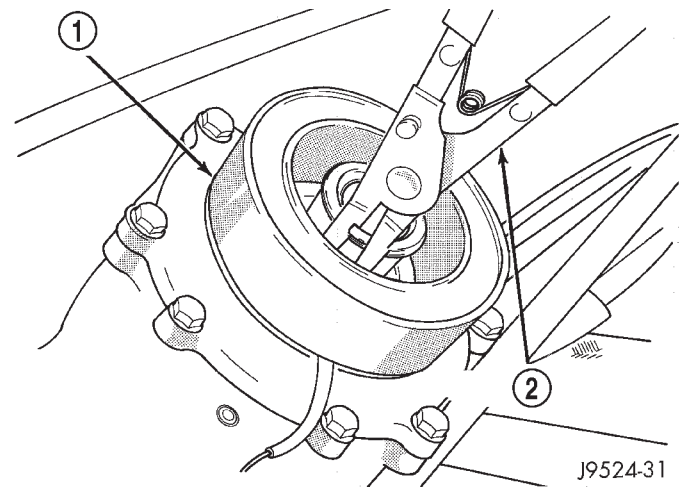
CLUTCH FIELD COIL SNAP RING REMOVE
